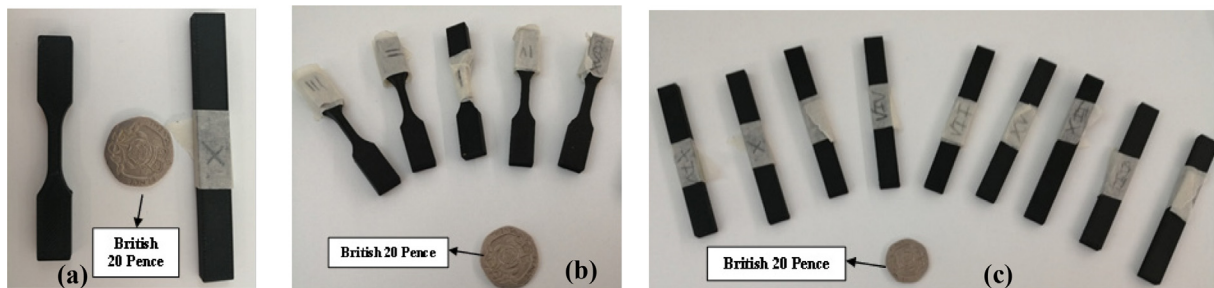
(a) Tensile and Flexural Test Specimen (b) Tensile Test Specimens [13] and (c) Flexural Test Specimens [14].
